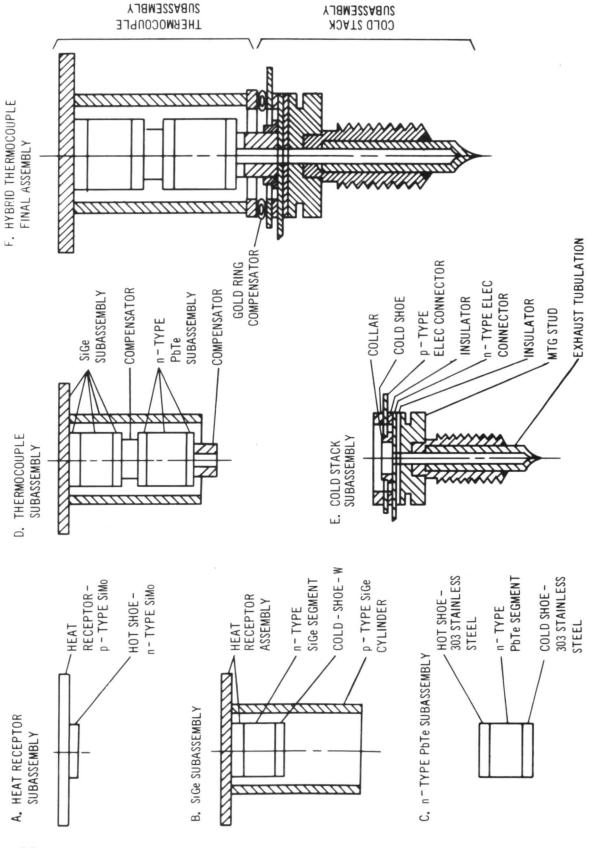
Hybrid Thermo couple Assembly Sequence - A
